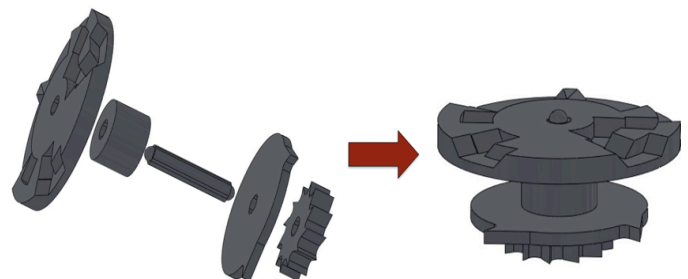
Re-designing the custom gear and disk component into multiple parts allows for easier mass-production
